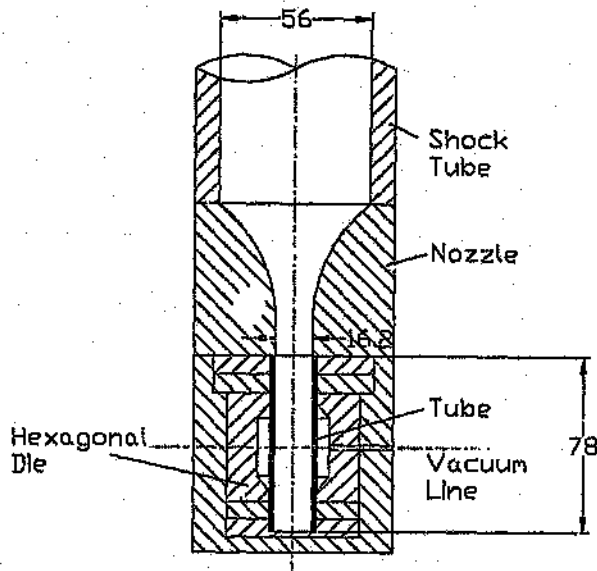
Test section for cylindrical tubes containing the hexagonal die
